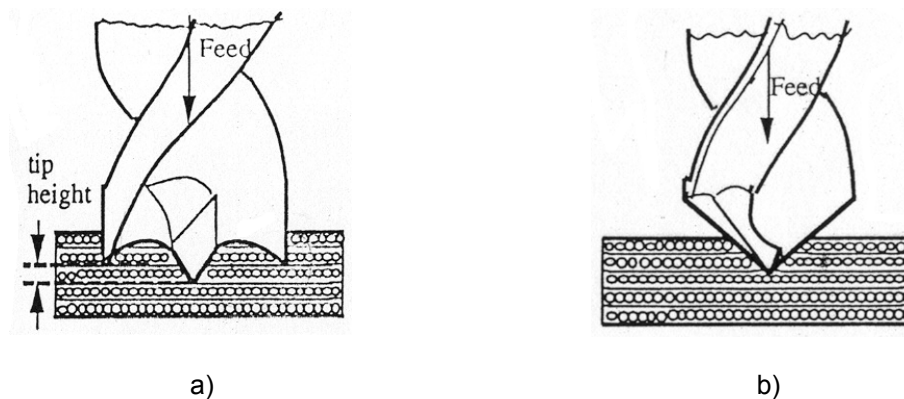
Different drill geometries: a) multifaceted drill; b) twist drill [56].
